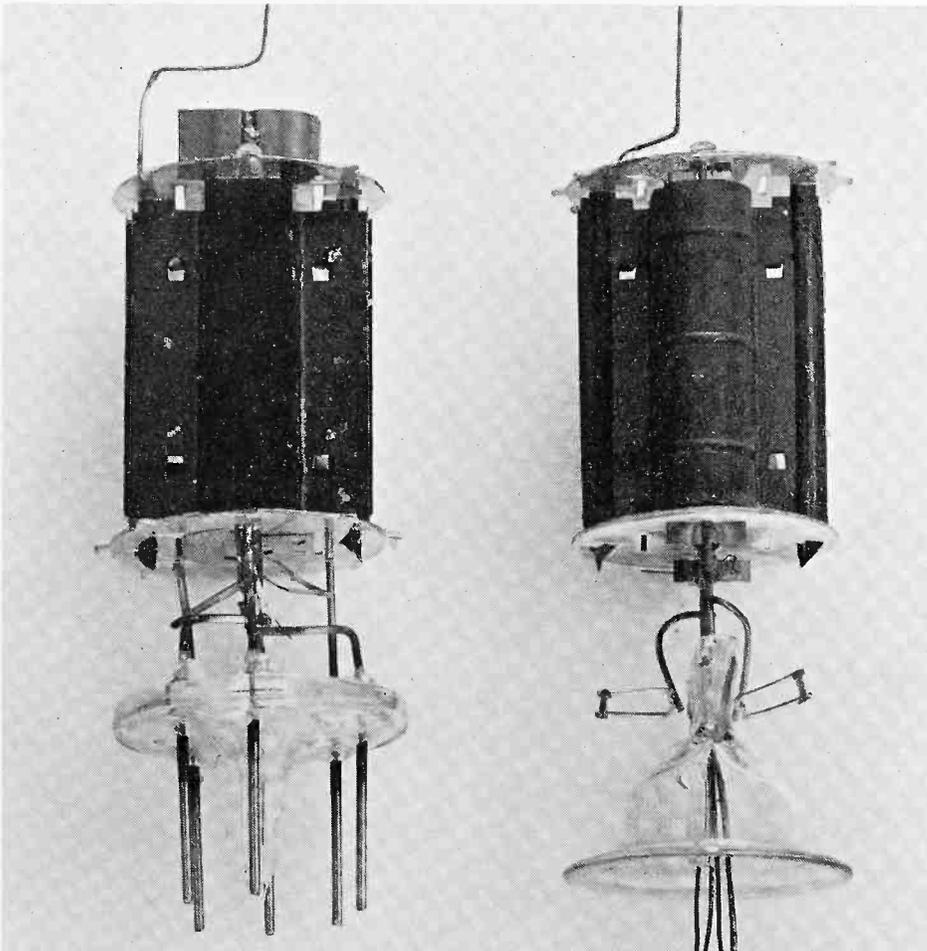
SHORTER, MORE RUGGED MOUNT. Added support, shorter construction, and larger diameter leads are clearly visible in the mount employing a wafer stem, left, as compared to the press stem mount shown on the right.
